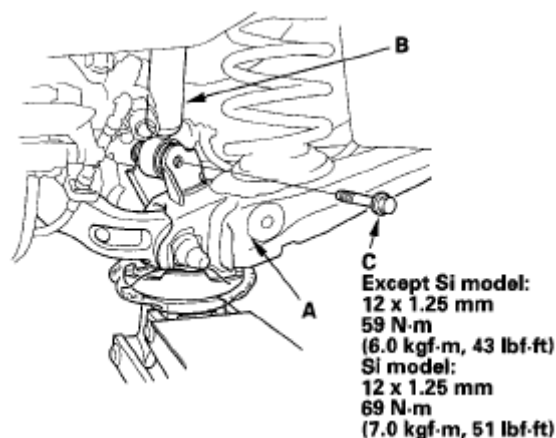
Identifying Flange Bolt (With Torque Specifications)
